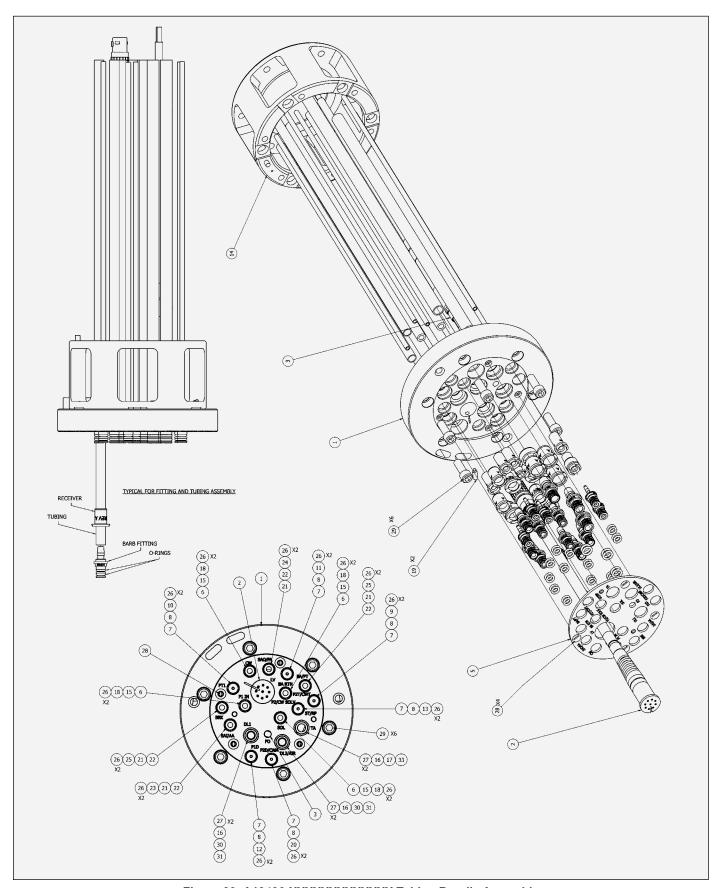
A13436-XXXXXXXXXXXXXXX Tubing Bundle Assembly
